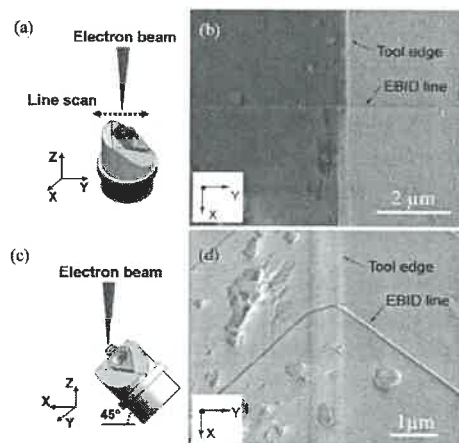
Illustration of diamond tool position in SEM chamber and measurement steps. (a) Side view of the diamond tool fixed on a 45° sample holder; (b) EBID line deposited across the center of the tool edge; (c) Diamond tool edge is tilted 45° towards the detector; (d) SEM image of diamond tool edge with EBID line collected after 45° tilt operation.
